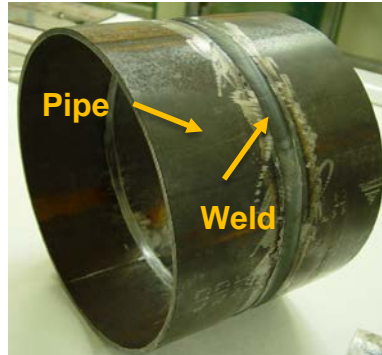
Actual dimension of Friction Stir Welded X52 steel pipe.
